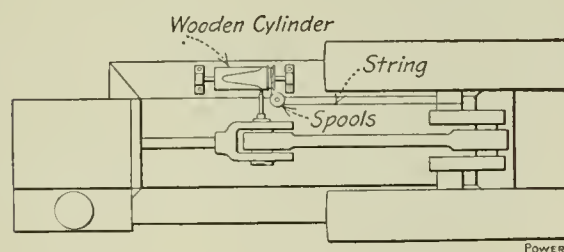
ARRANGEMENT FOR DRAWING DIAGRAM
